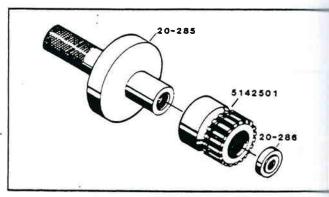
Alignment Tool (Capscrew-Mounted Cam Gear).
